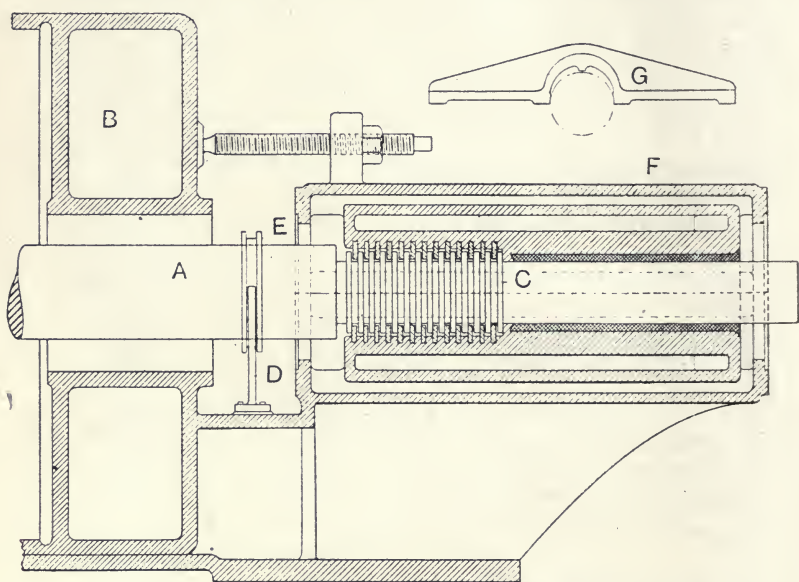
THRUST BLOCK OF "TARANTULA" SHOWING METHOD OF ADJUSTING BLADE CLEARANCES.
